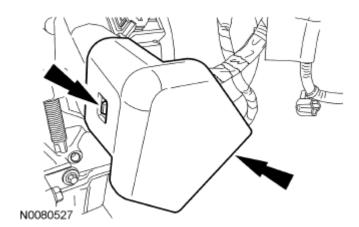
Locating Locking Tab And Generator Air Duct Courtesy of FORD MOTOR CO.
